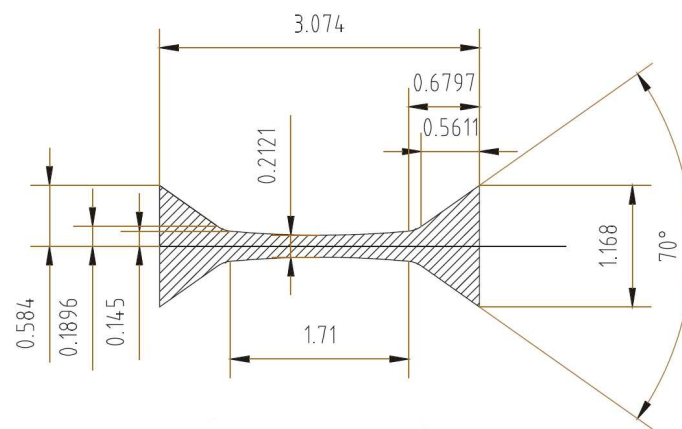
Technical drawing of the miniaturized tensile test specimen.
